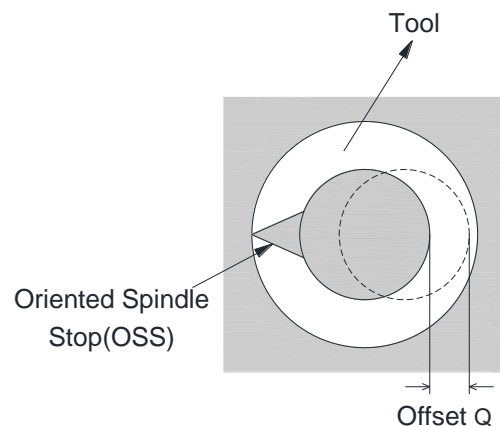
Sketch of Oriented Spindle Stop (OSS)
